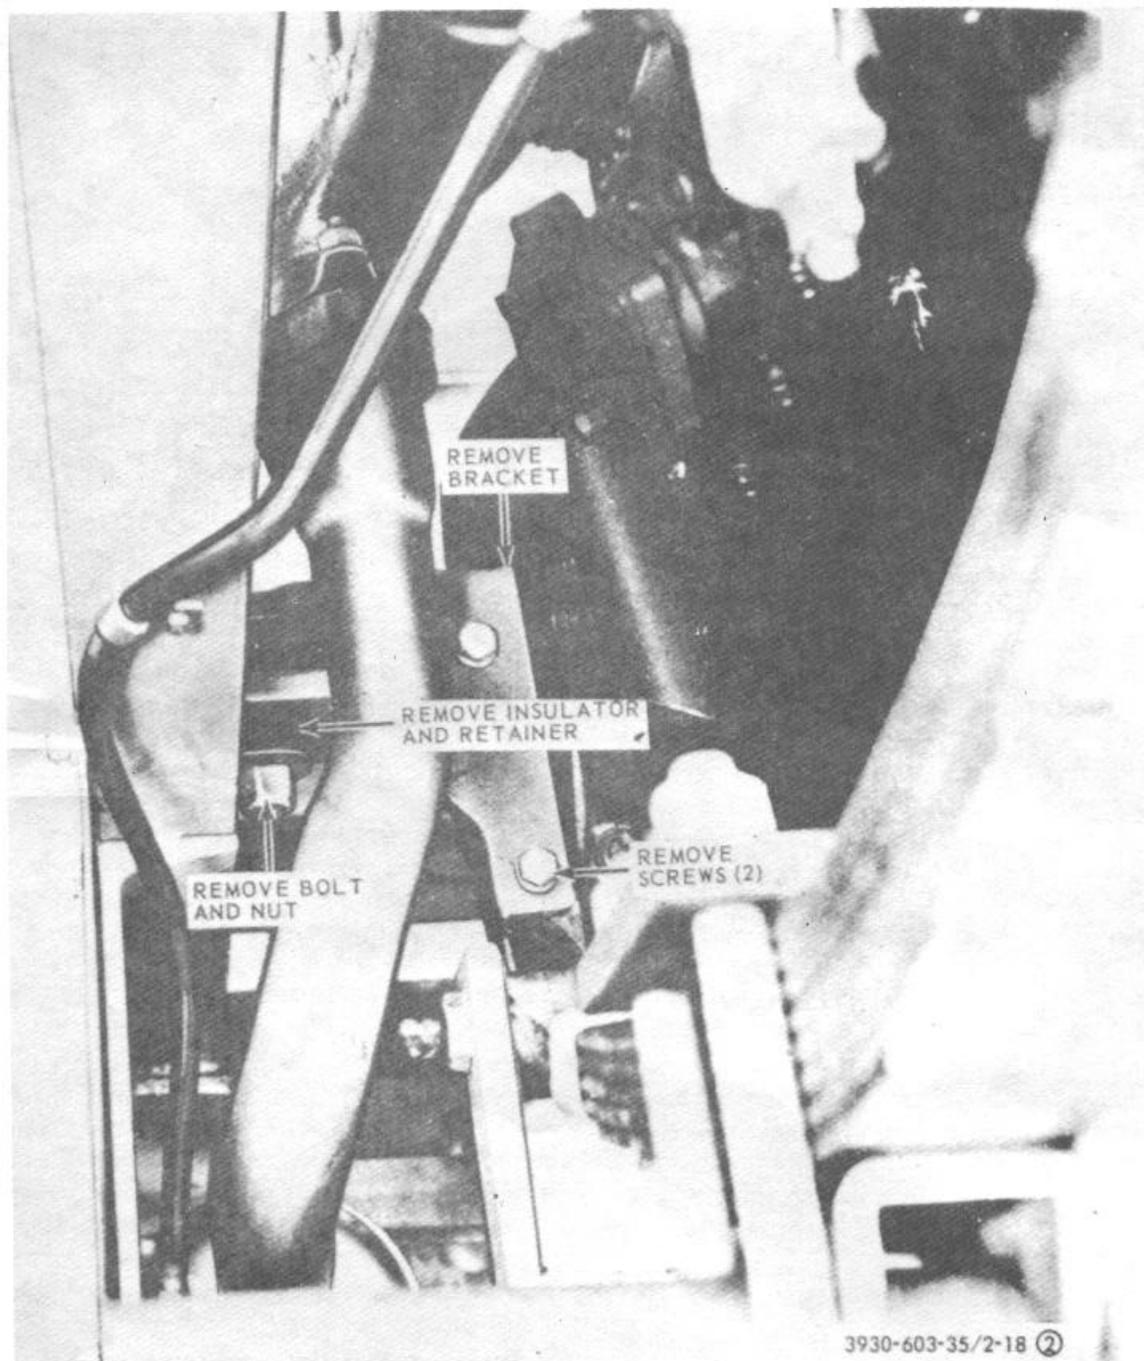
(2). Engine assembly, removal and installation (continued).
